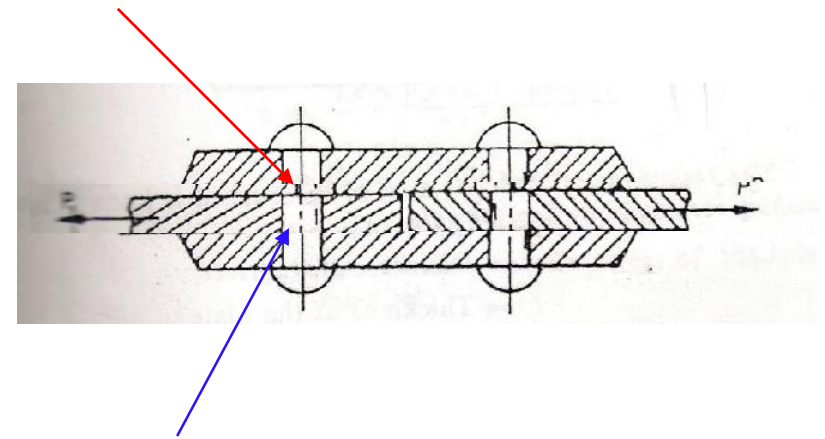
Shearing off a rivet in double cover butt joint.
